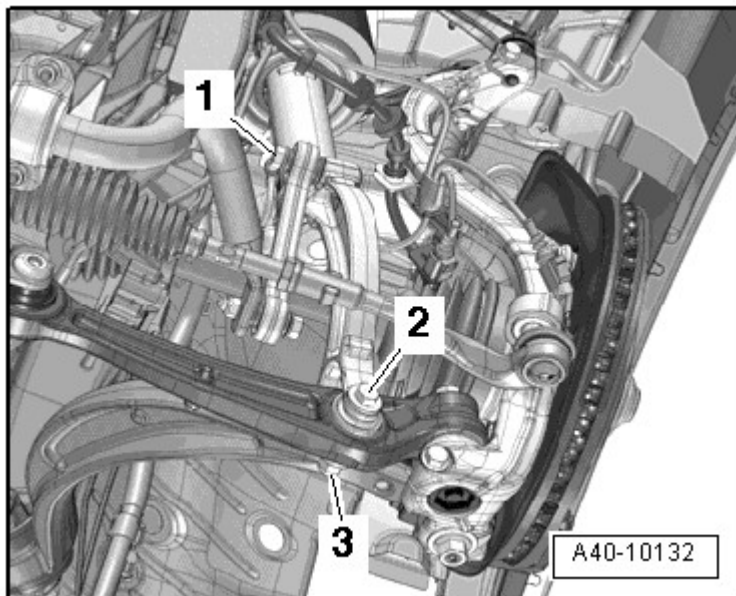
Identifying Left And Right Stabilizer Bar Bolt
